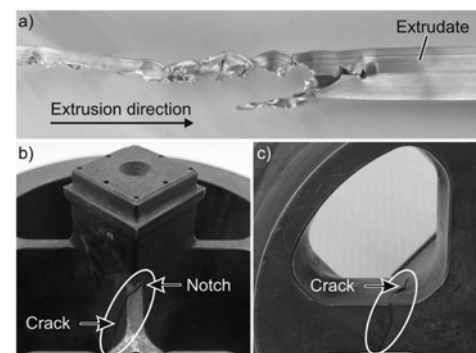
Thinned profile (a), top (b) and back (c) view of the cracked laser melted mandrel of the extrusion die
